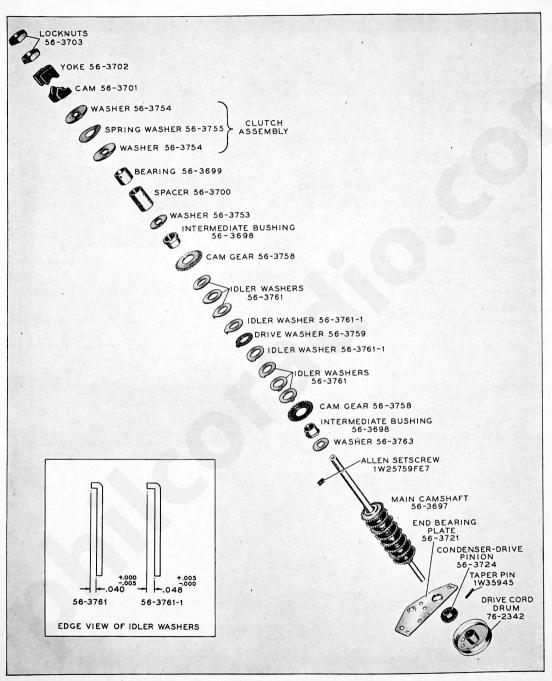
EXPLODED VIEW OF MAIN CAMSHAFT
